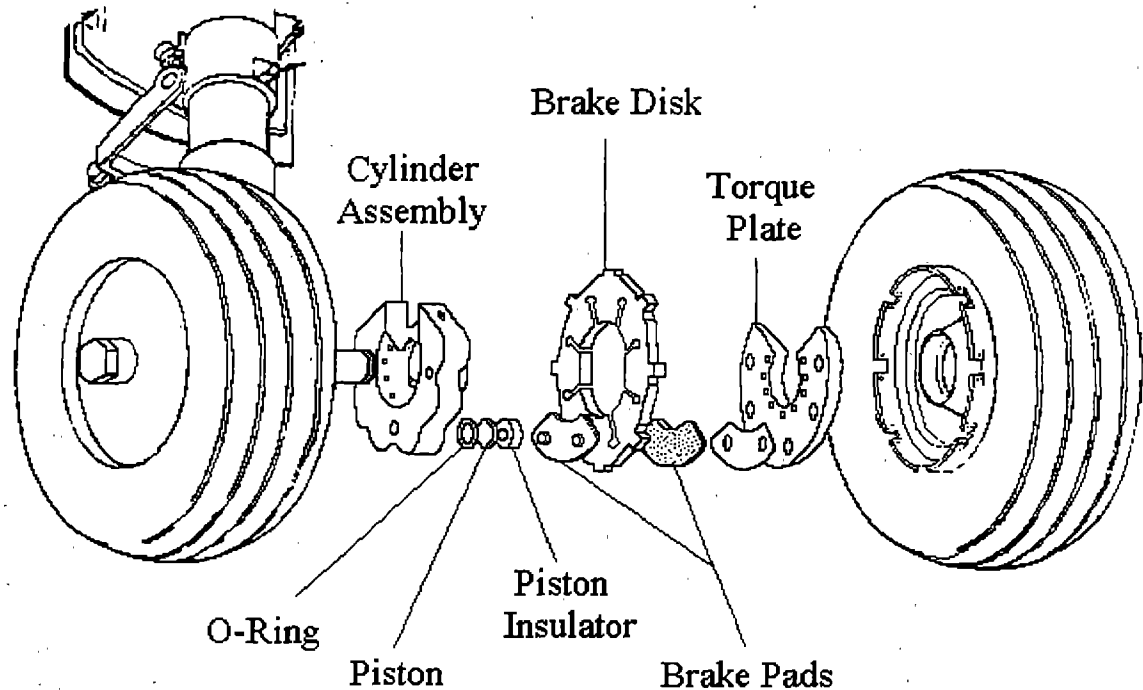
B.F. Goodrich 2-1203 Disk Brake Assembly
